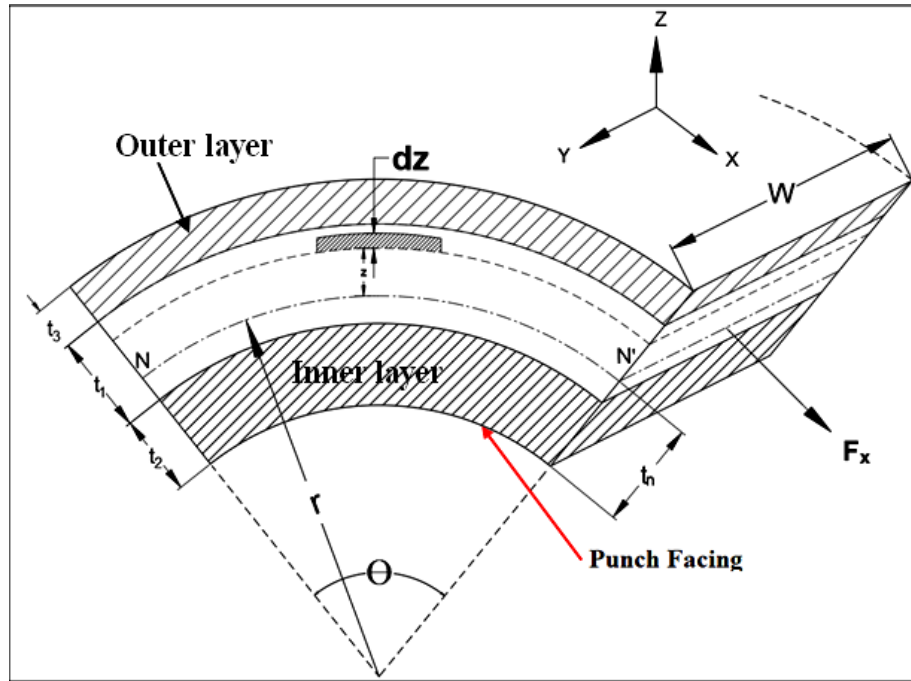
Plane strain bending of a three-ply clad sheet
